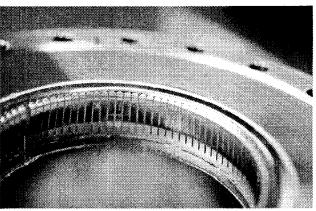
Spring Fingers as welded into Mounting Flange.
